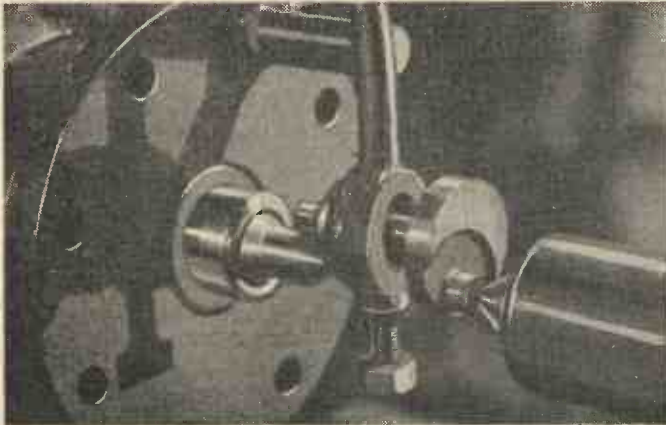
Showing the shaft mounted ready for turning the pin and finishing the front face.
